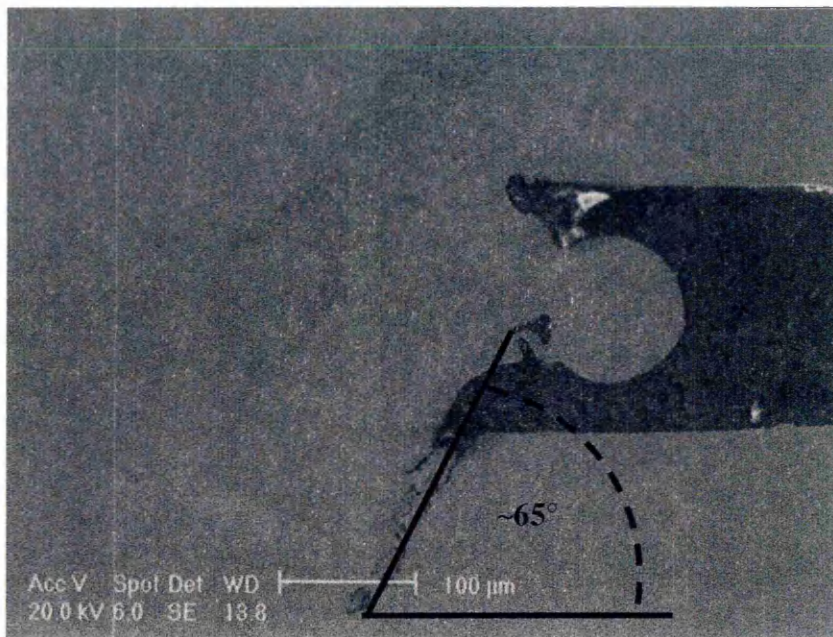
Secondary electron image showing fatigue crack initiation in the 1mm 2205 from 1.2mm V1437 (top) – 1mm 2205 dissimilar metal lap joint
